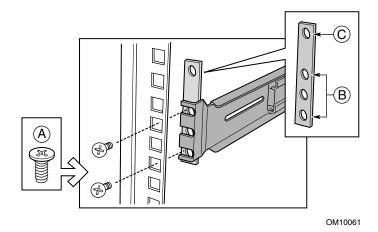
Attaching Rail Brackets to the Cabinet Rack
